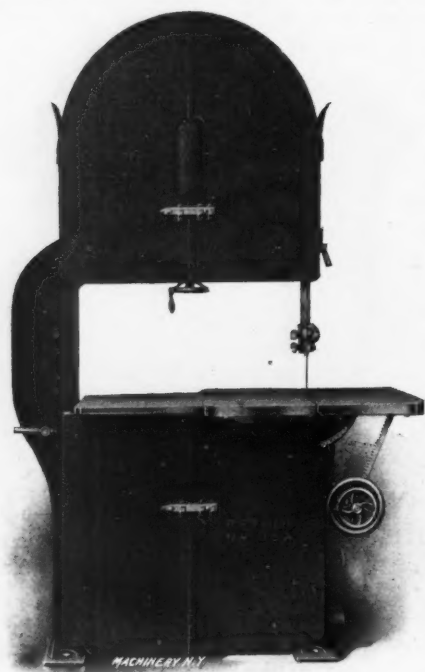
Prybil Band Saw Machine with Hinged Covers or Guards
